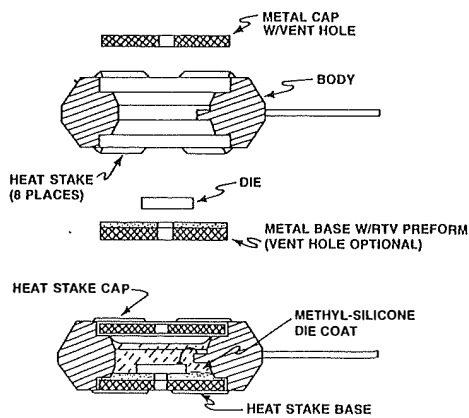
Cross Sectional View of a Chip Carrier Pressure Transducer Package.
